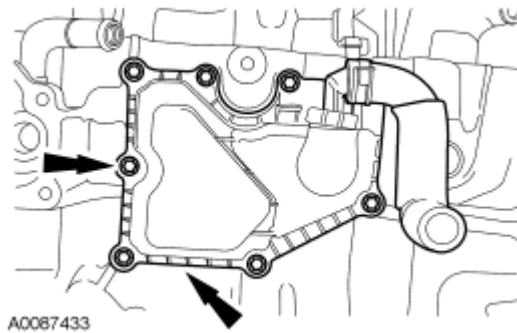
Locating Crankcase Vent Oil Separator And Bolts
